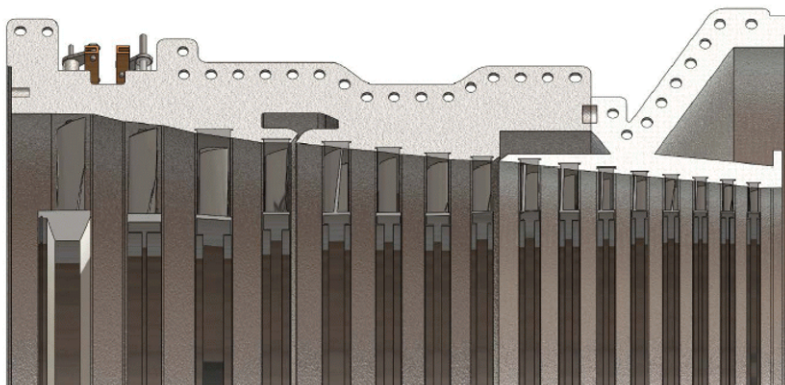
Compressor with variable stator stagger angle mechanism, Turbomachinery Design Project, Texas A&M.
